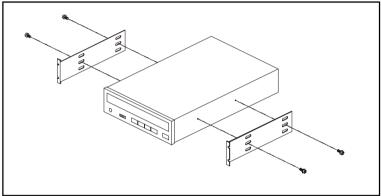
Attaching mounting brackets to a half-height device for mounting in device space next to the fan tray module
